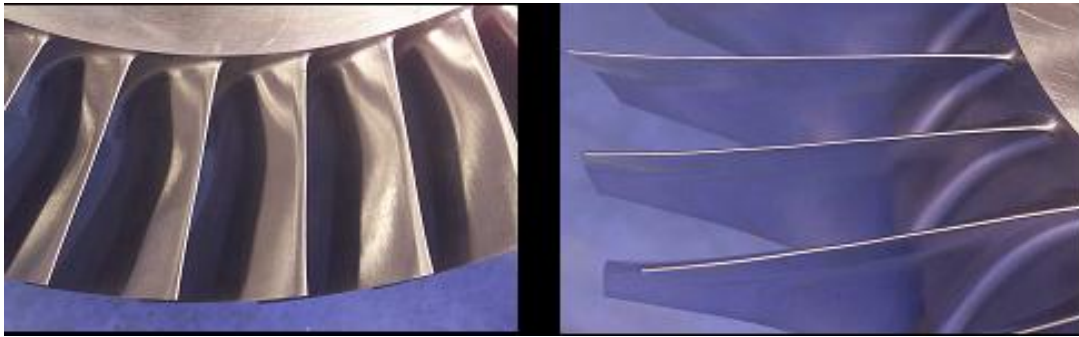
Blisk prior to wire EDM removal of blade specimen.
